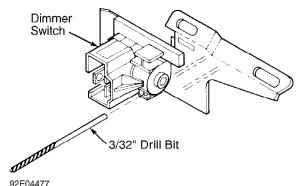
Adjusting Dimmer Switch Courtesy of General Motors Corp.
